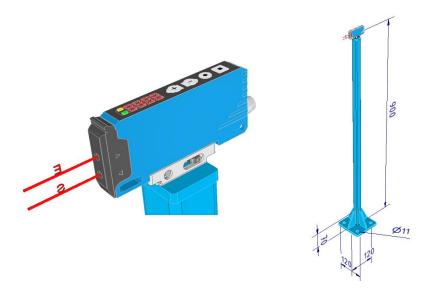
Dimensional drawing in mm (inch) of the mounting system BEF-WLL180.
